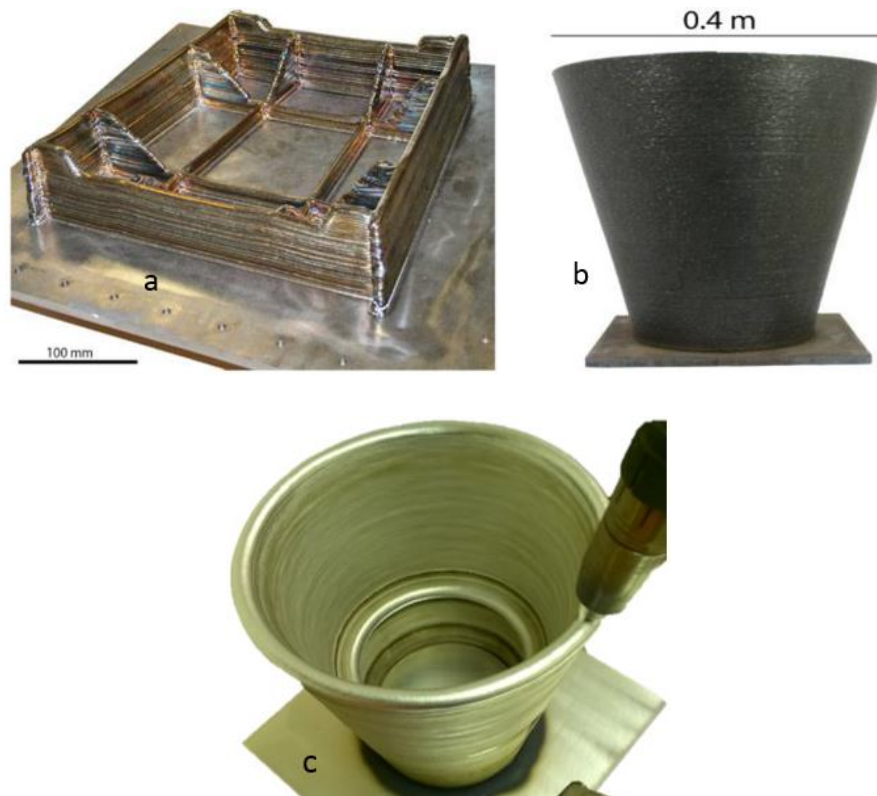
Parts produced by WAAM at Cranfield University: (a) 24Ti-6Al-4V external landing gear assembly; (b) mild steel truncated cone (c) Aluminium complex cone
